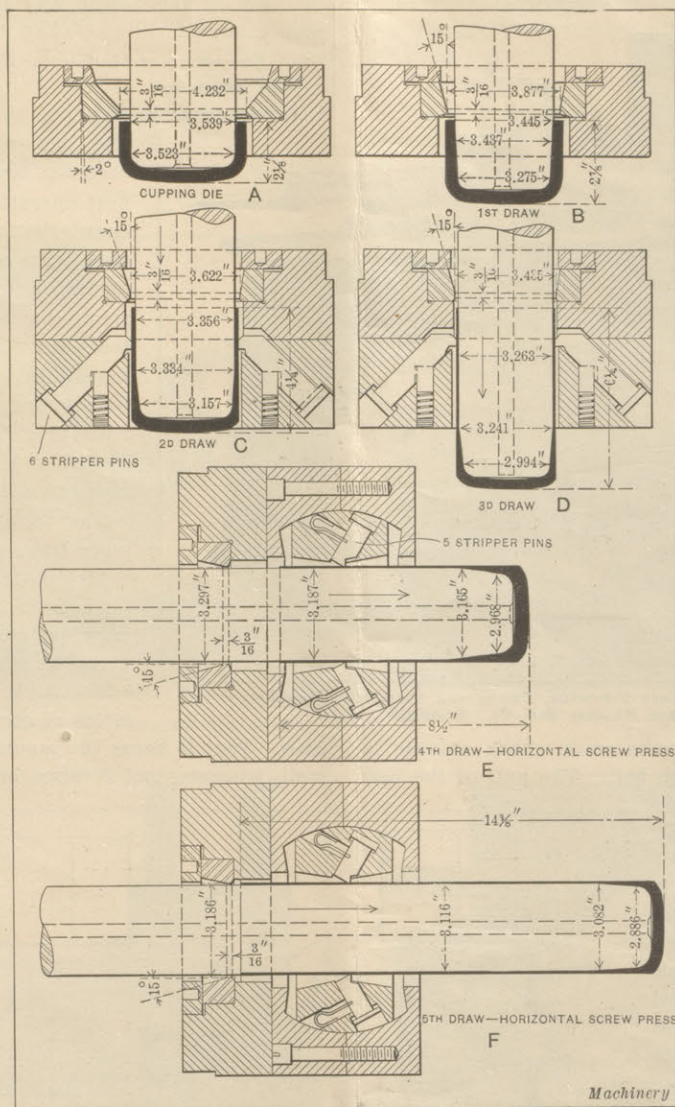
Tools for drawing a 3-inch Shrapnel Cartridge Case—Ferracute Machine Co.'s Method
